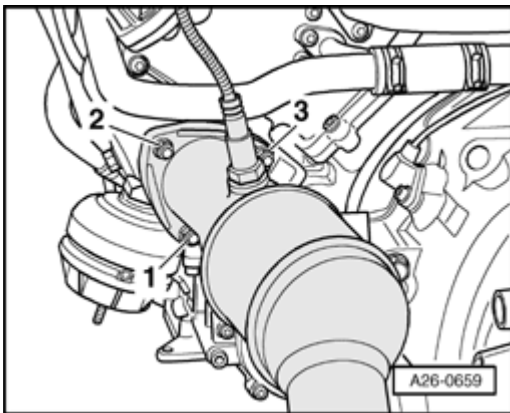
Removing/Installing Nuts For Left Front Exhaust Pipe/Exhaust Manifold
